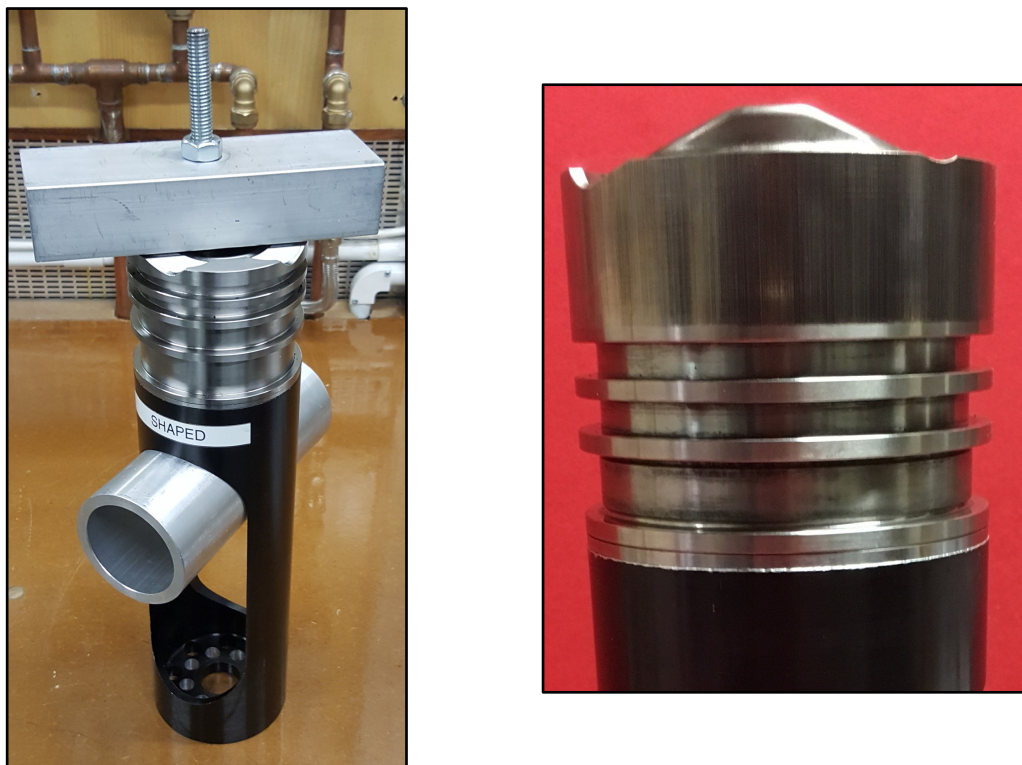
Photographs showing the method used for measuring the required thickness of the spacer (left) and the spacer installed in the piston assembly (right).
